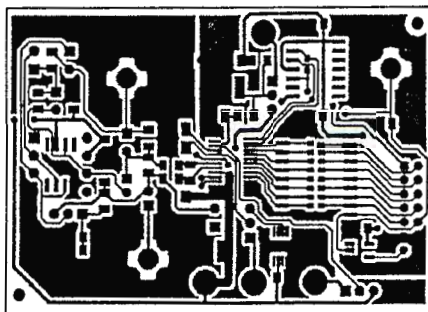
Suggested Evaluation Circuit Board—Component Side Layout
